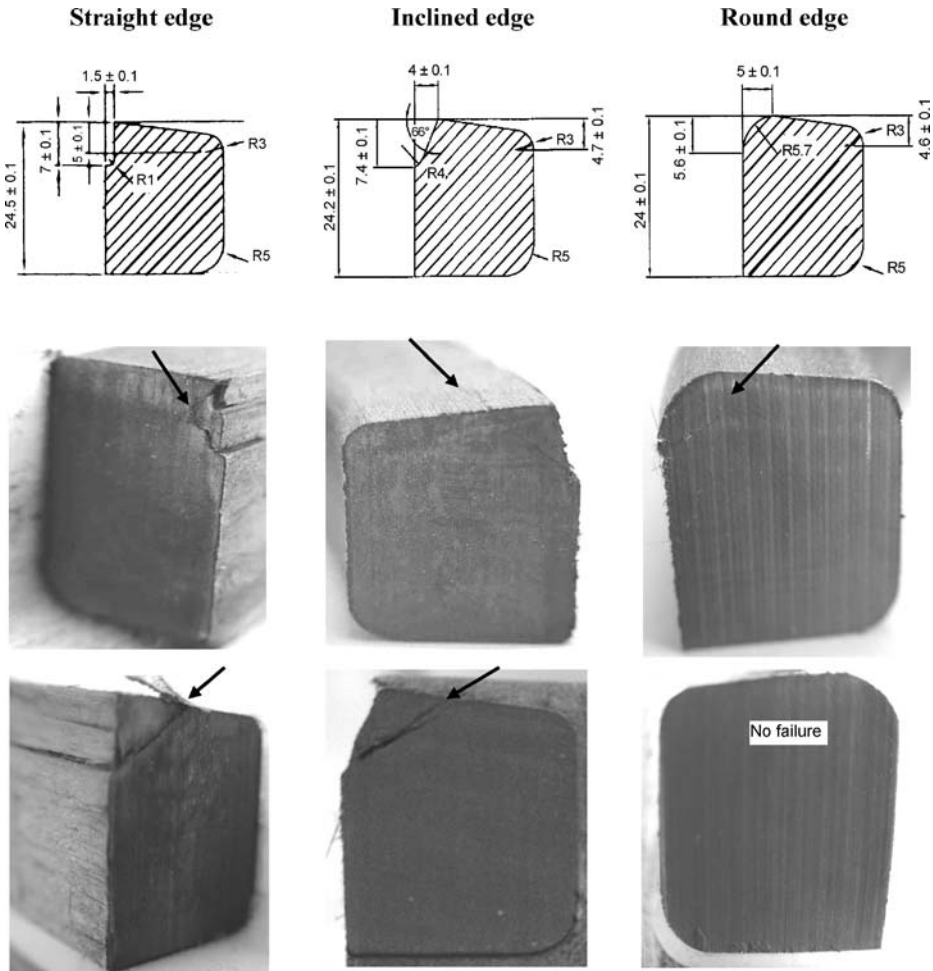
Cross-sectional view of different CFR-E ring geometries and failure after full-scale testing at 150 MPa.
